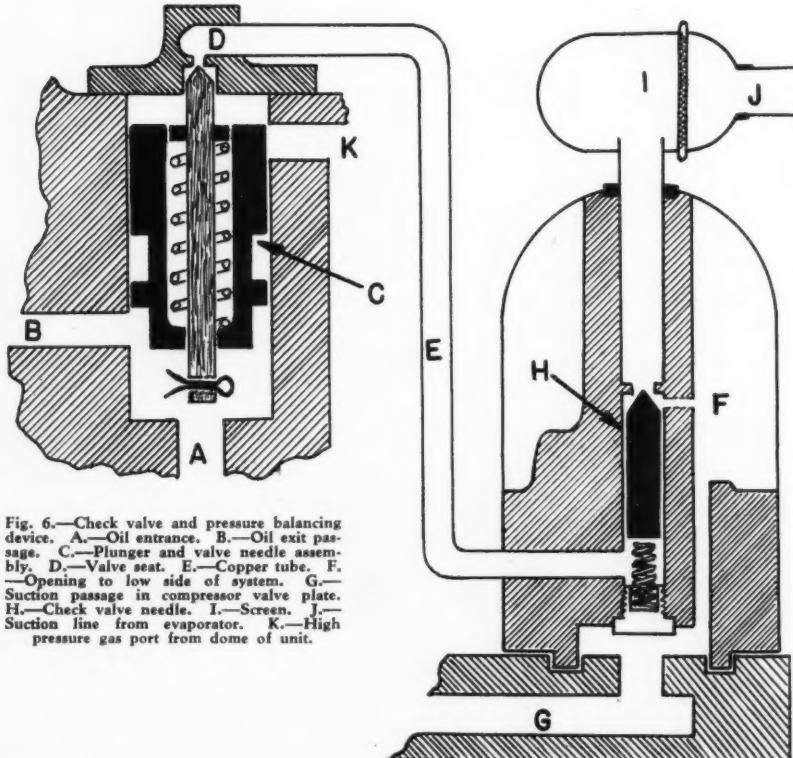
Check valve and pressure balancing device. A.—Oil entrance. B.—Oil exit passage. C.—Plunger and valve needle assembly. D.—Valve seat. E.—Copper tube. F.—Opening to low side of system. G.—Suction passage in compressor valve plate. H.—Check valve needle. I.—Screen. J.—Suction line from evaporator. K.—High pressure gas port from dome of unit.
